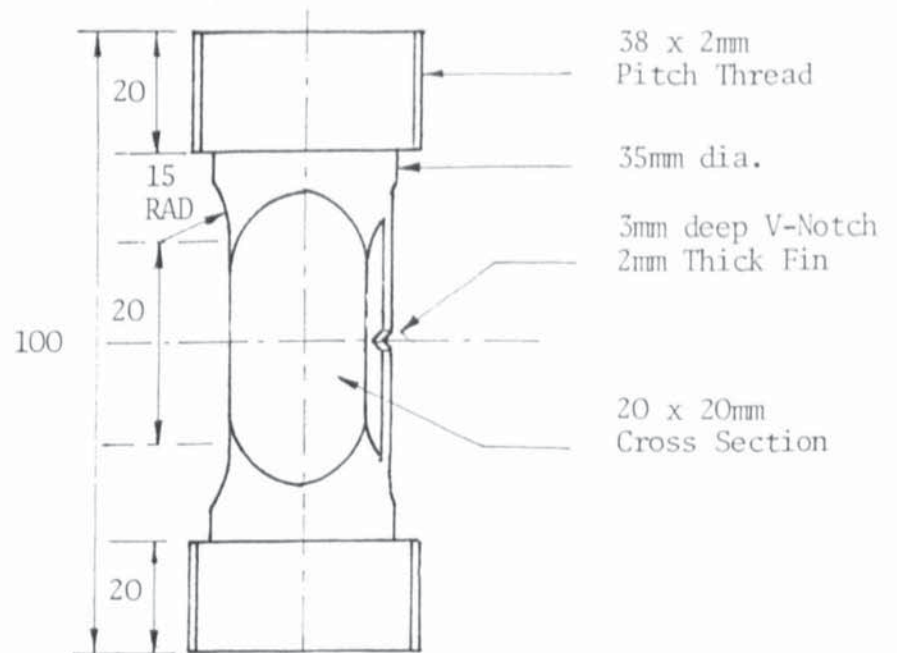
Corner-Crack Specimen Design for Long Cracks. (mm)
